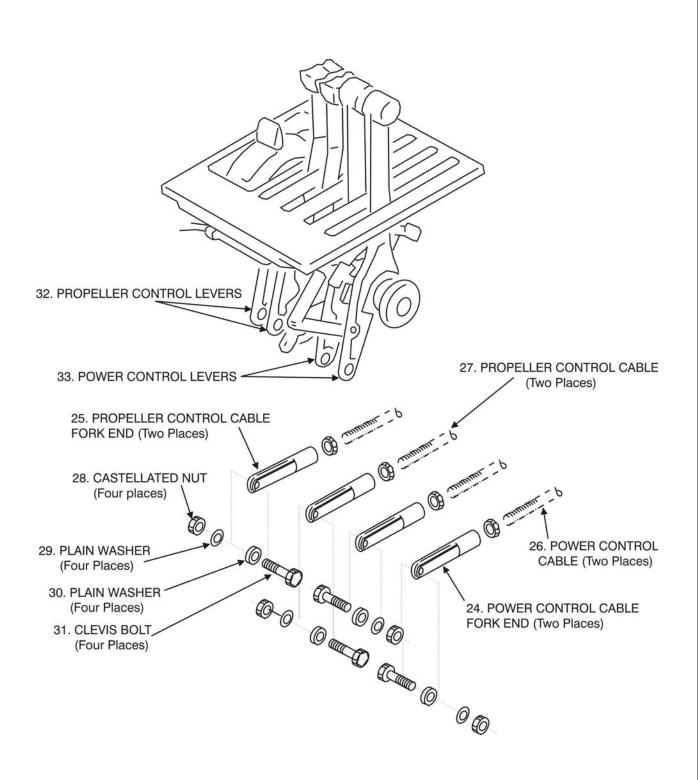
Power/Propeller Control Cables (Fuselage-Engine) - Removal/Installation (Sheet 1 of 4)
